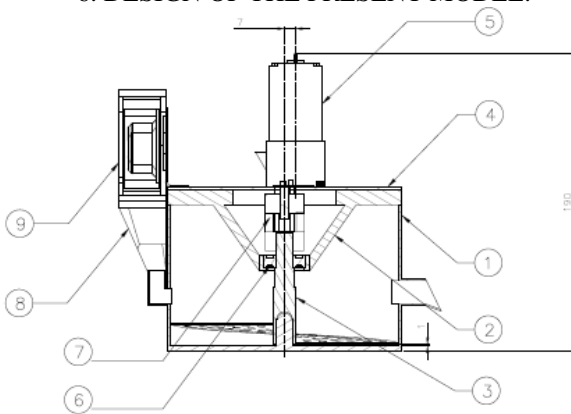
Sectional view 1-container,2-stirrer mount,3-stirrer,4-lid,5-motor, 6-bearing,7-coupling,8-blower duct,9-blower.
